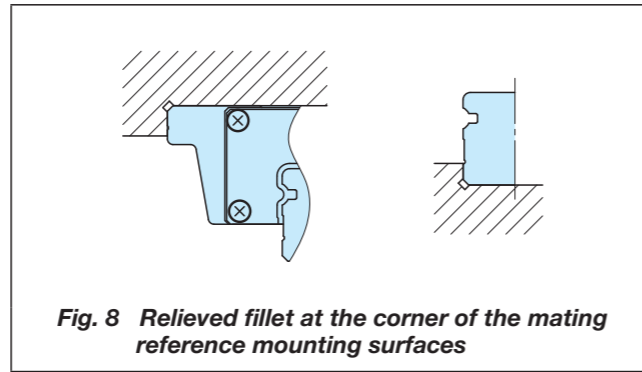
Relieved fillet at the corner of the mating reference mounting surfaces
